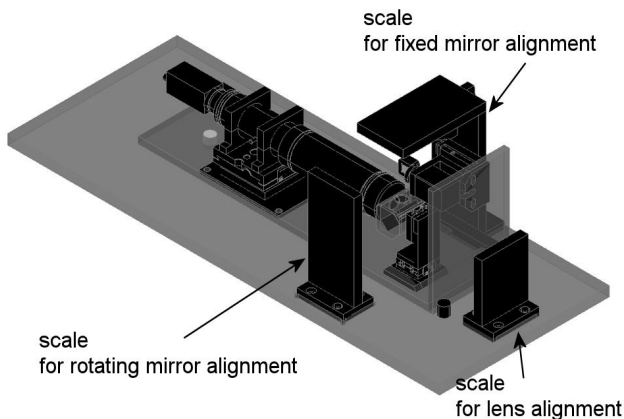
Assembly jig for the alignment of CCD camera, lens, fixed and rotating mirrors, jointly developed by KIMM and Future Science (South Korea)
